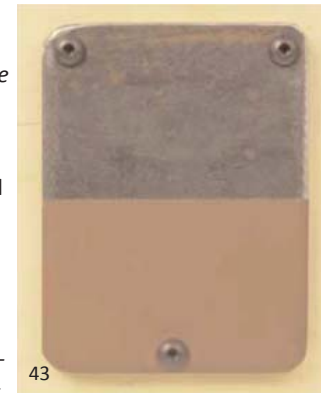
Sharp Edges ground smooth Courtesy of AISC
